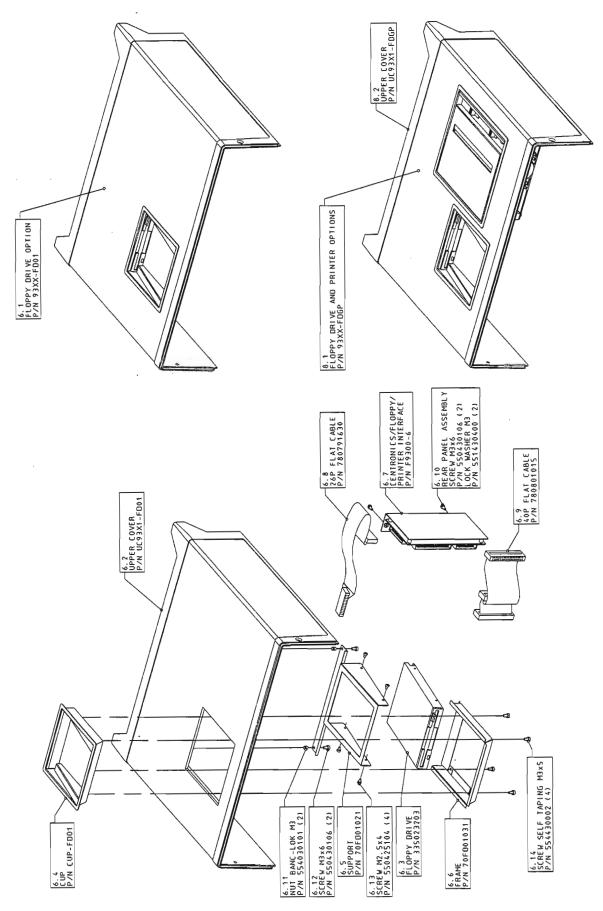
Floppy Drive Assembly P/N: 335023203
